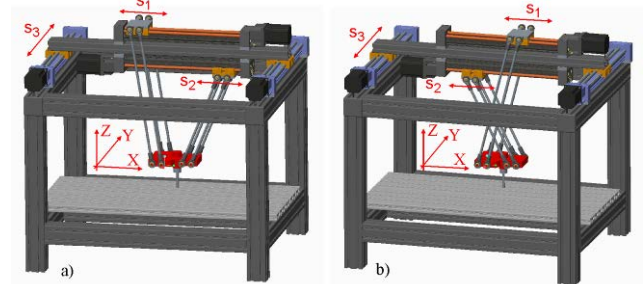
Virtual prototype of a) extended and b) crossed form of the O-X glide hybrid kinematic milling machine
